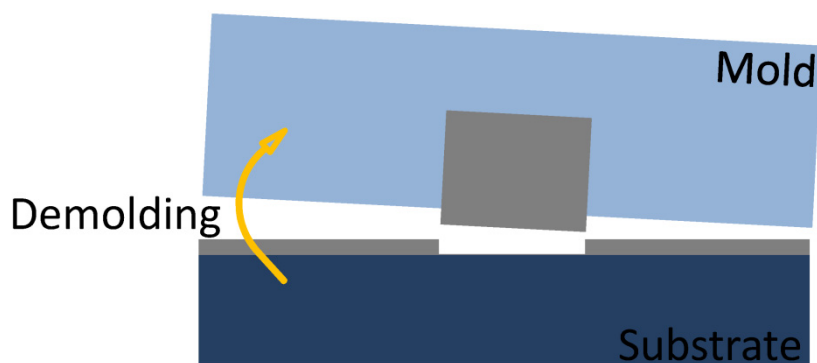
The defects caused by the polymer being torn apart during the demolding process.
